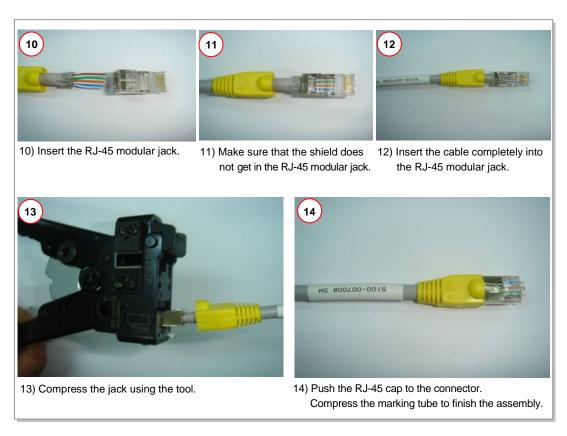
Assembling the RJ-45 Connector (Shield Type) (2)
